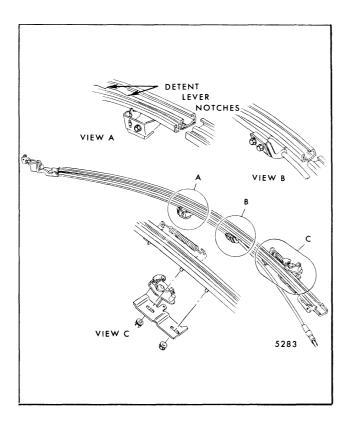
Window Right Guide Cam and Drive Cable Details
